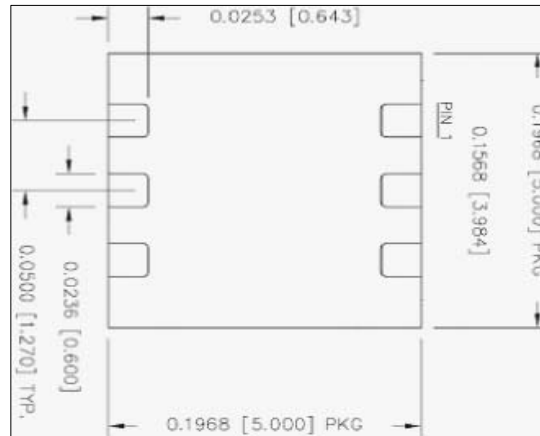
Recommended PCB layout to accommodate CCBC012 package
